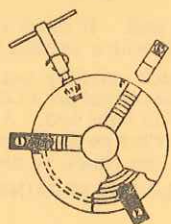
PARTS OF A UNIVERSAL CHUCK
